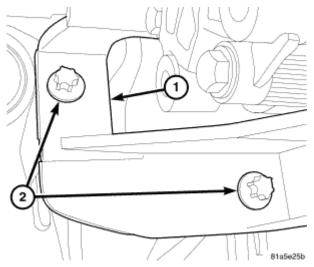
Identifying Rear Power Steering Pump Mounting Bracket Bolts Courtesy of CHRYSLER LLC
